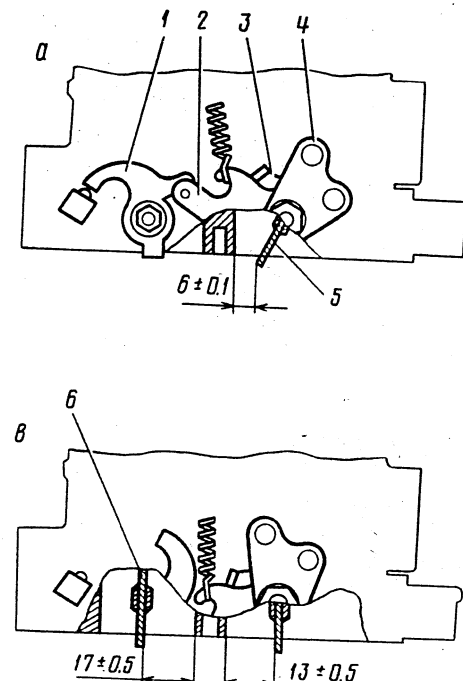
Adjusting the Position of Throttle Valve in Carburettors 2107-1107010-10 and 2107-1107010-20:
